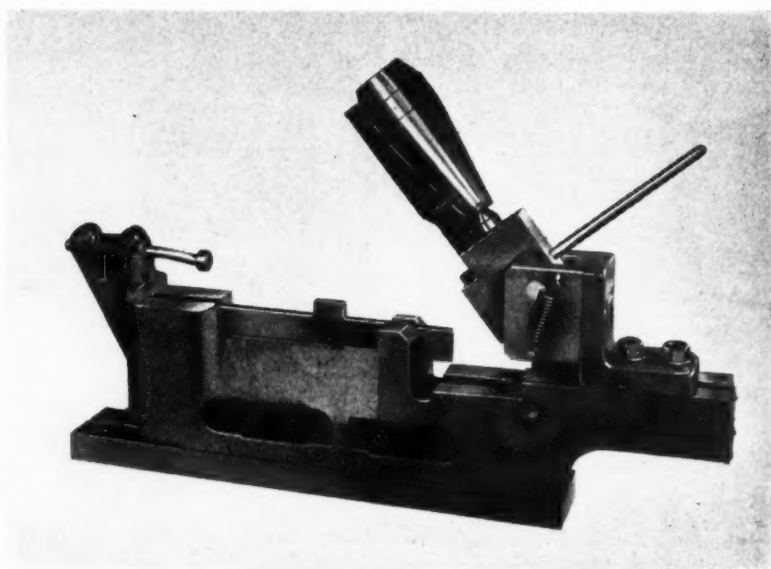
Hinged Cradle Type Fixture for Lowering 60- or 81-millimeter Trench Mortar Shells to the Grinding Position
